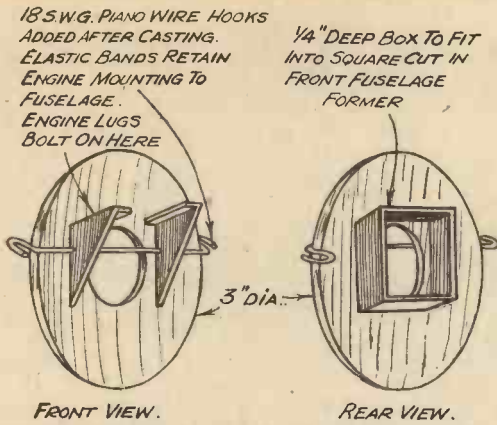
A front and rear view of the wooden pattern for a cast elektron mounting for the "Elf" or other 3-c.c. engine.
